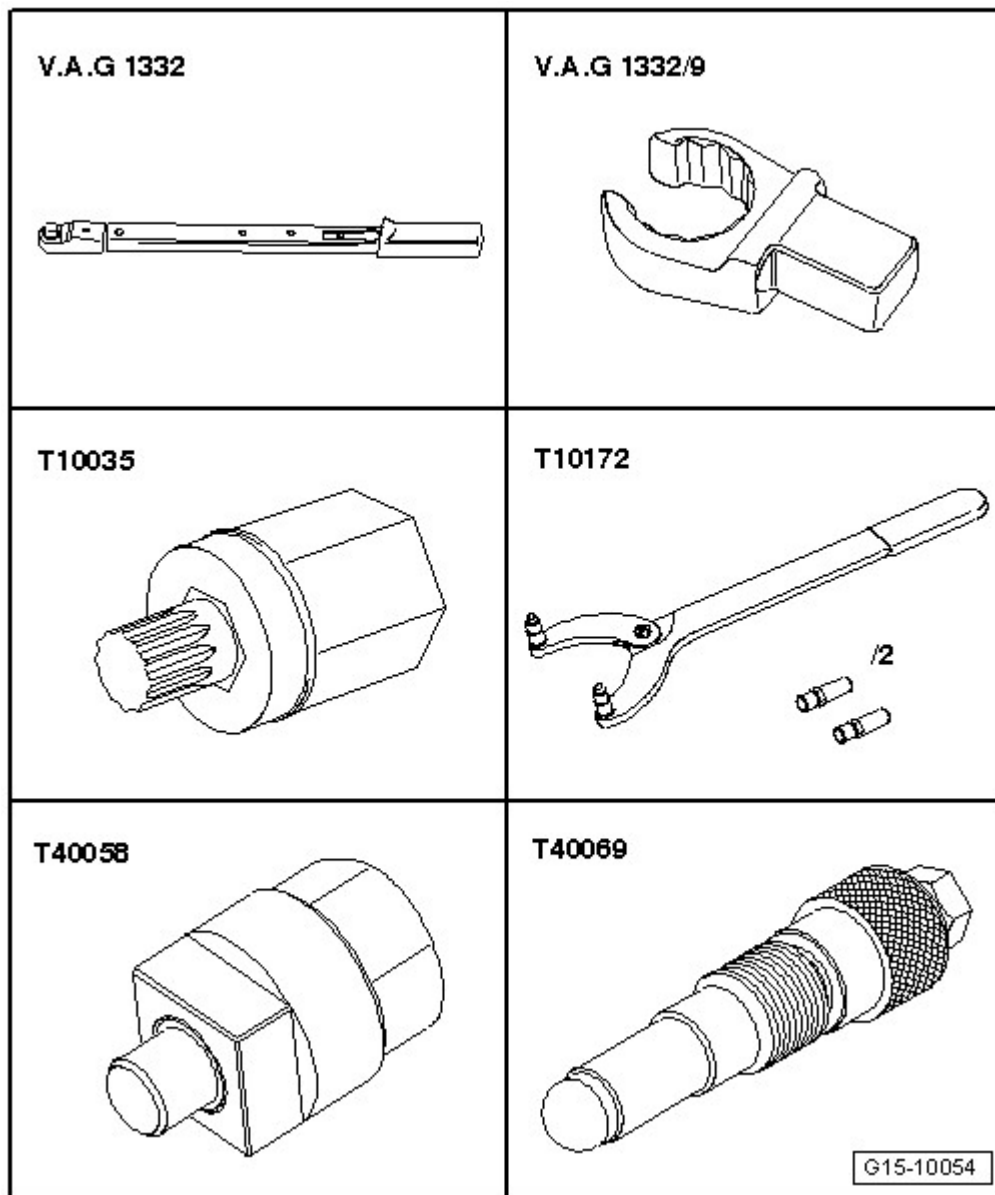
Identifying Special Tools -- Camshaft Timing Chains, Removing From Camshafts
